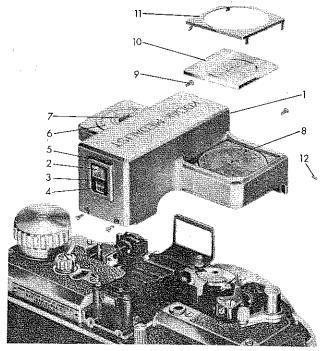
Direct View Finder Cover Assembly, Exploded from Camera
